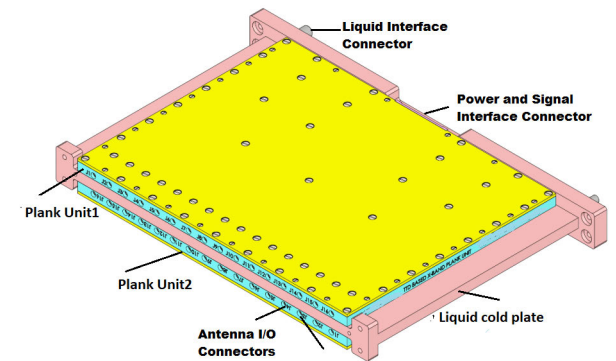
Integrated view of two plank units on the liquid cold plate.
